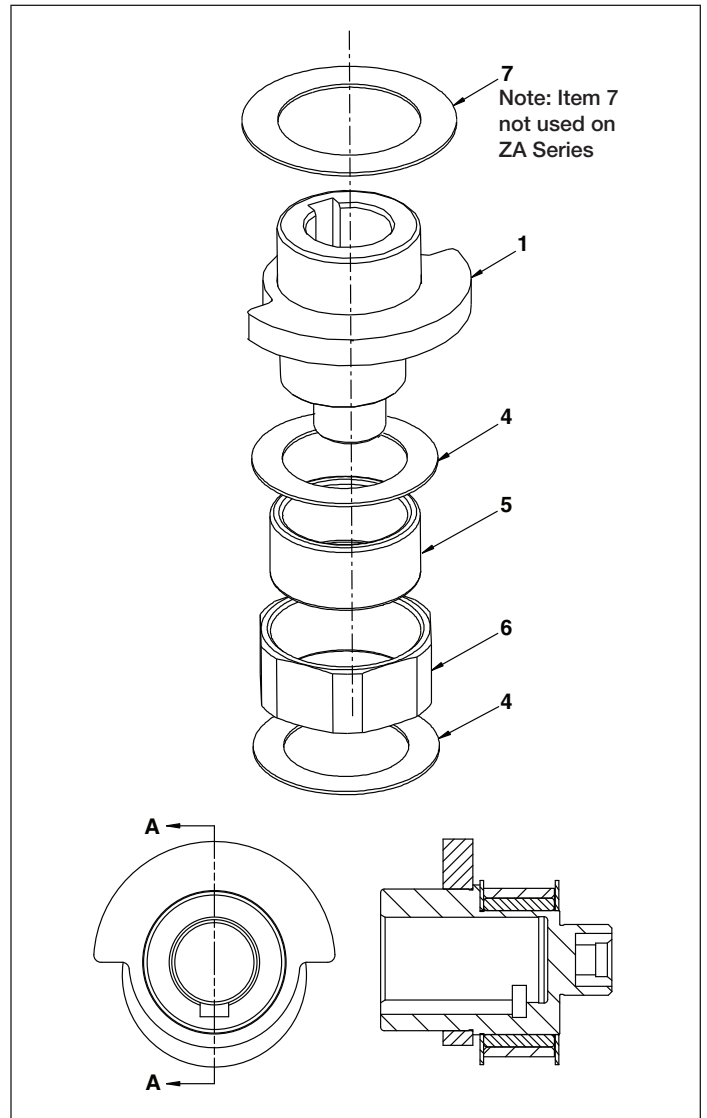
B, Eccentric Assembly for Direct Drive (ZE, ZG and ZW Series - Date Code D Only) (ZA Series - All Date Codes)
